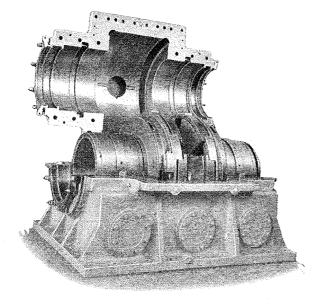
Large six-shoe propeller thrust bearing with two journal bearings. Collar and shaft not shown. See Figure 56.
